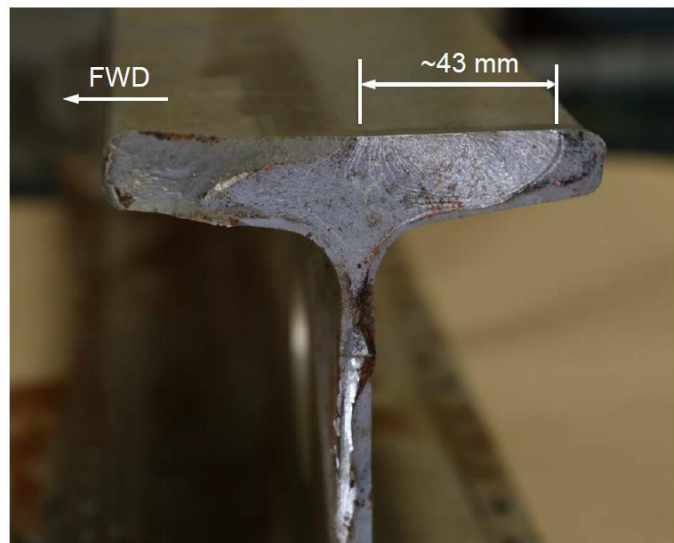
Photograph of Cessna T210M Fractured Carry -Through Spar INBD Fracture Surface.
